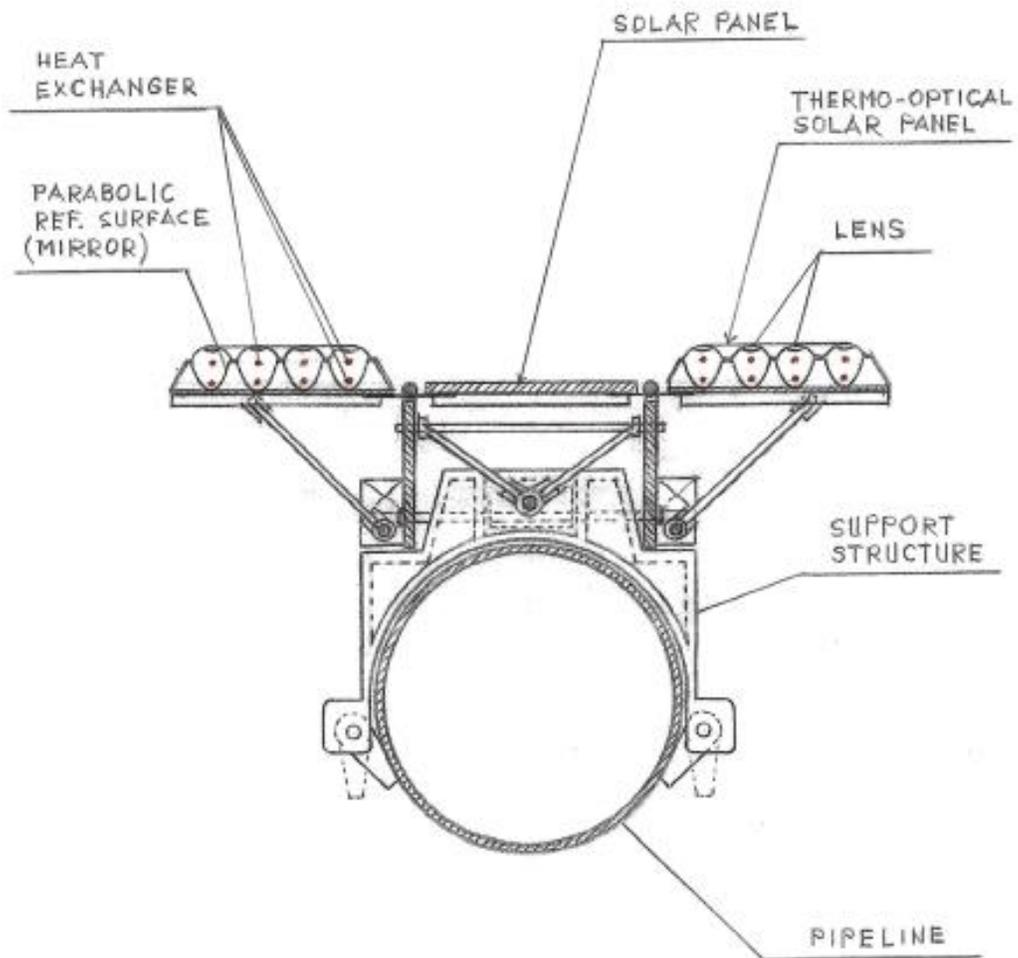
Cross-sectional View of a Solar Panel Assembly
